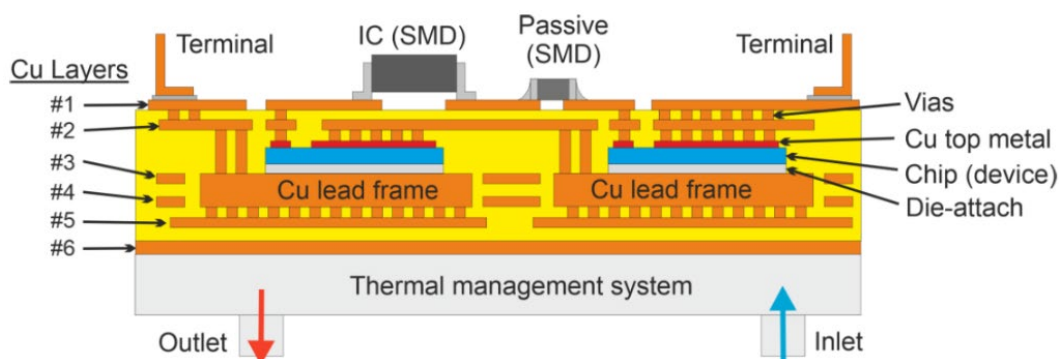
Cross section of a PCB featuring chip embedding (source: CSIC)
